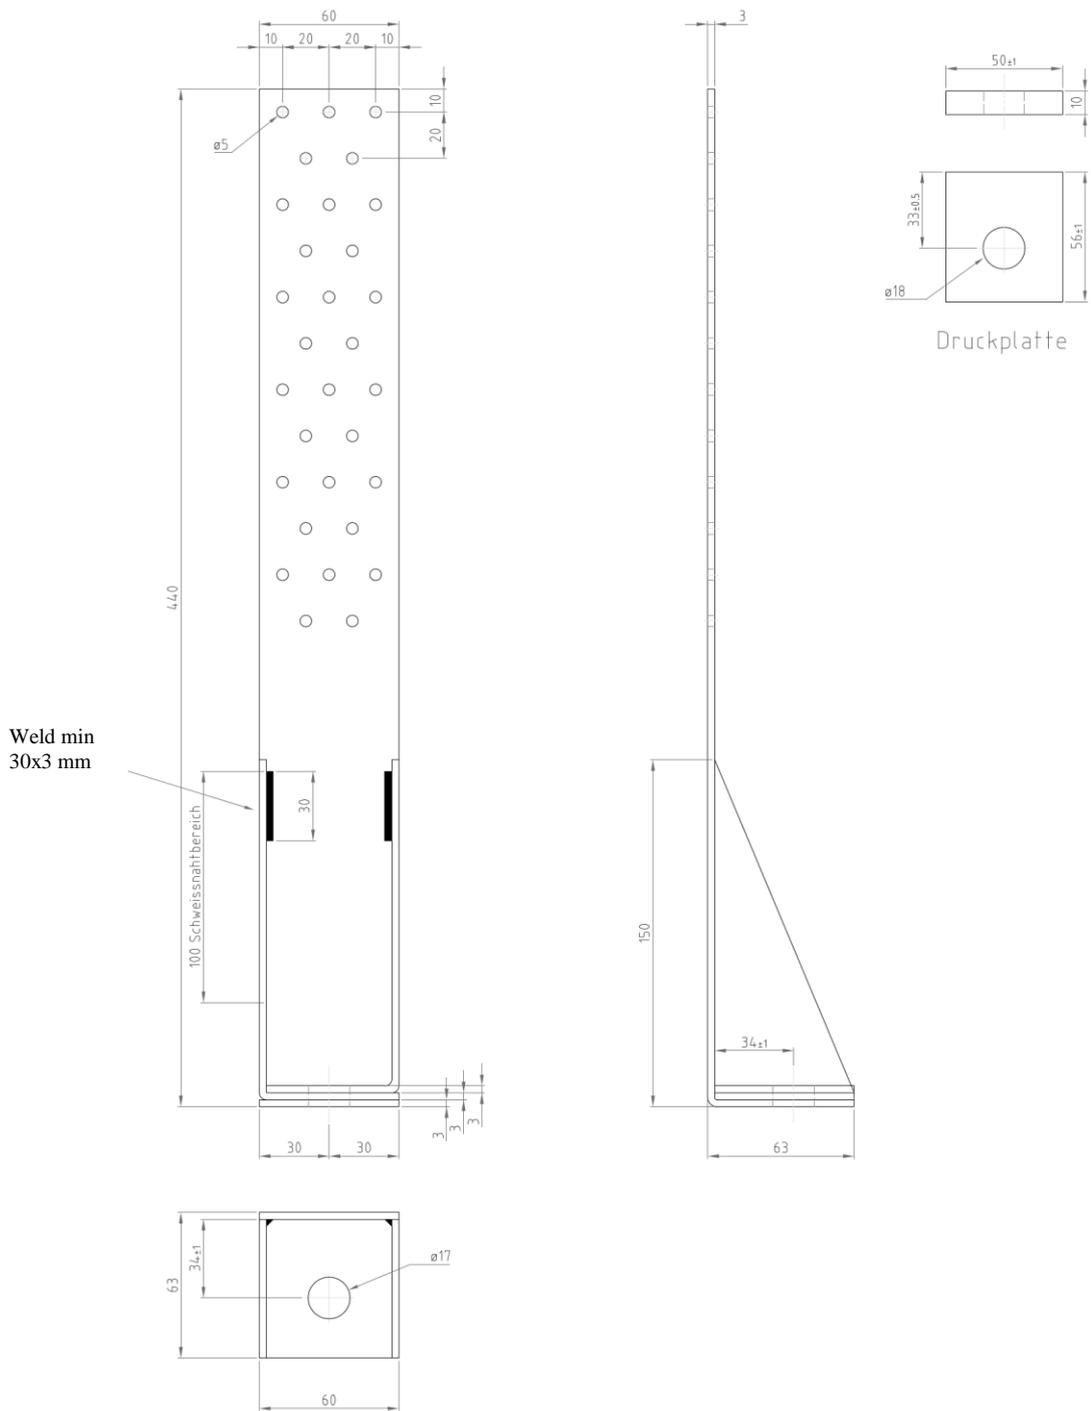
Dimensions of type GH HT22 60/440 (drawing with washer 56x50x10)
